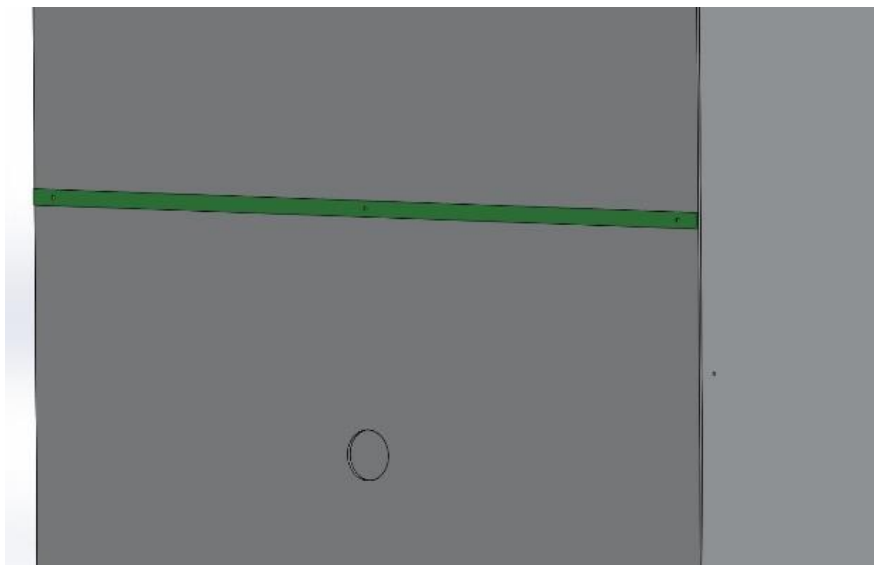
A narrow aluminum bar is mounted on rear plate.
